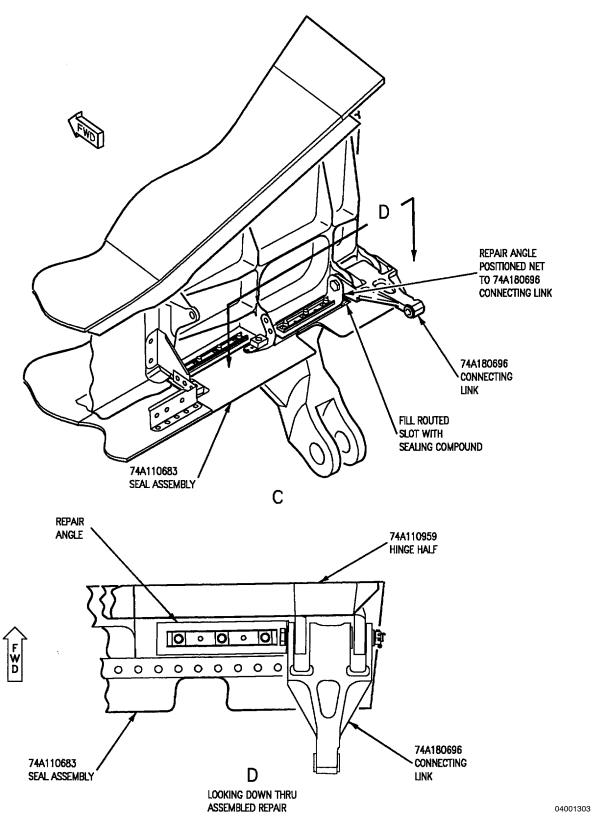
74A110959 Inboard Trailing Edge Flap Hinge Half Cracked Flange Repair (Sheet 3)
